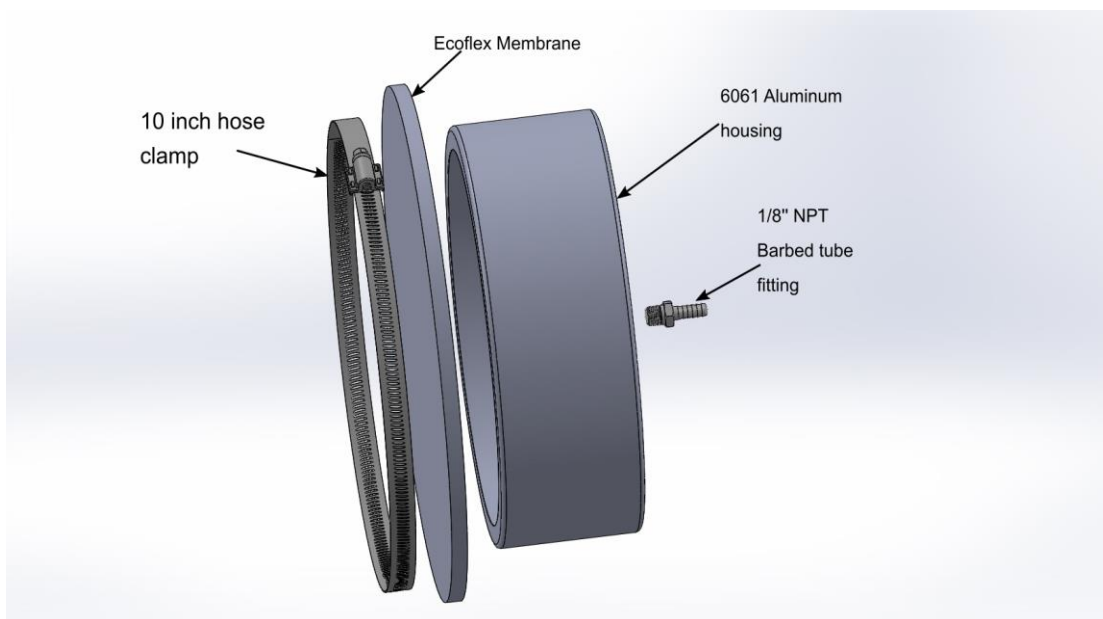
Exploded view of the reflector assembly drafted using SolidWorks 2016.
